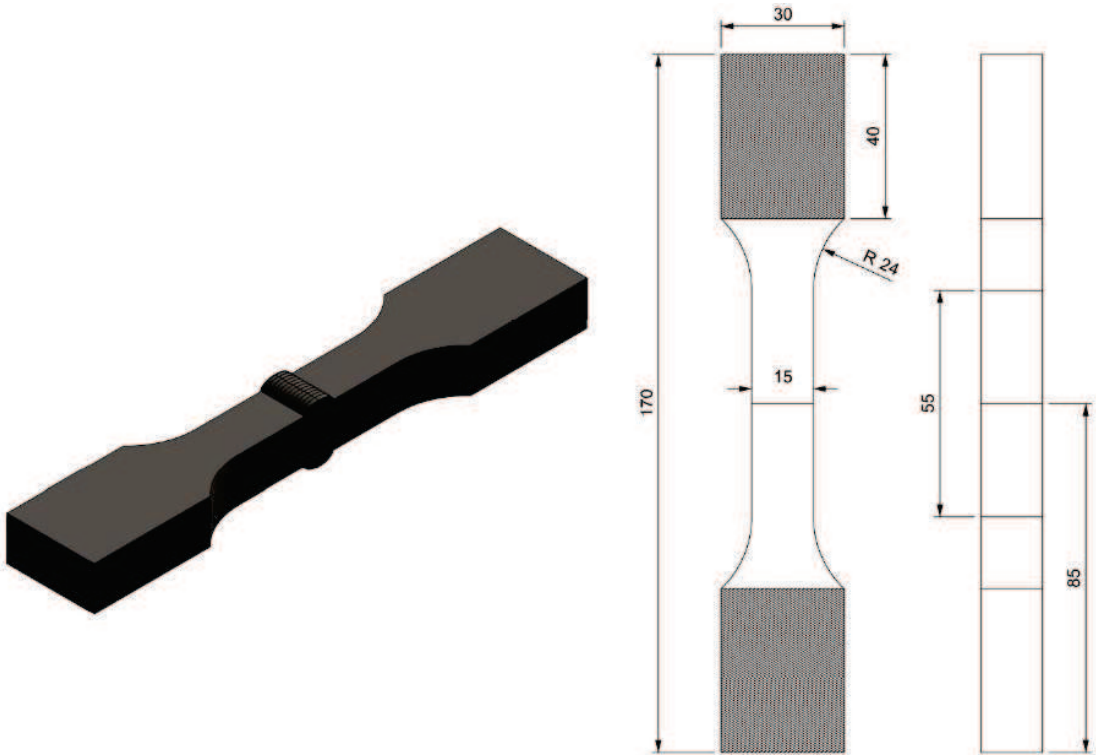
Tensile test specimen, dog bone, with butt welding.
